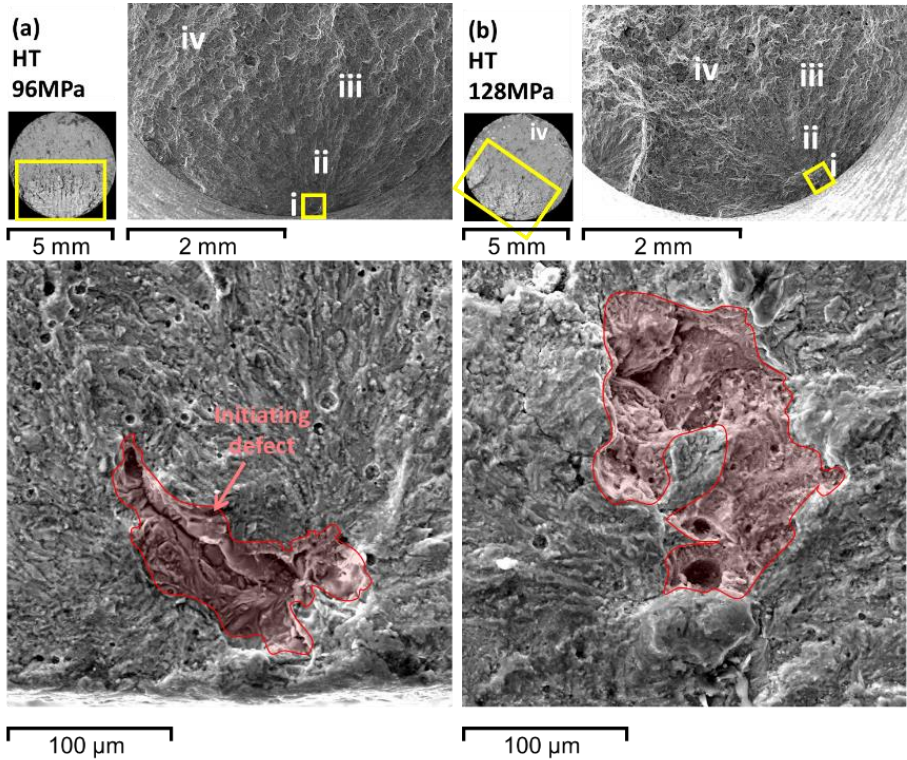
Fracture surfaces of (a) and (b) two HT specimens marked by letters a and b. Top-left: Light microscopy images of the whole fracture surface. Top-right: SEM micrograph of the crack initiation and propagation zones. Below: defects responsible for the fatigue fracture initiation.
